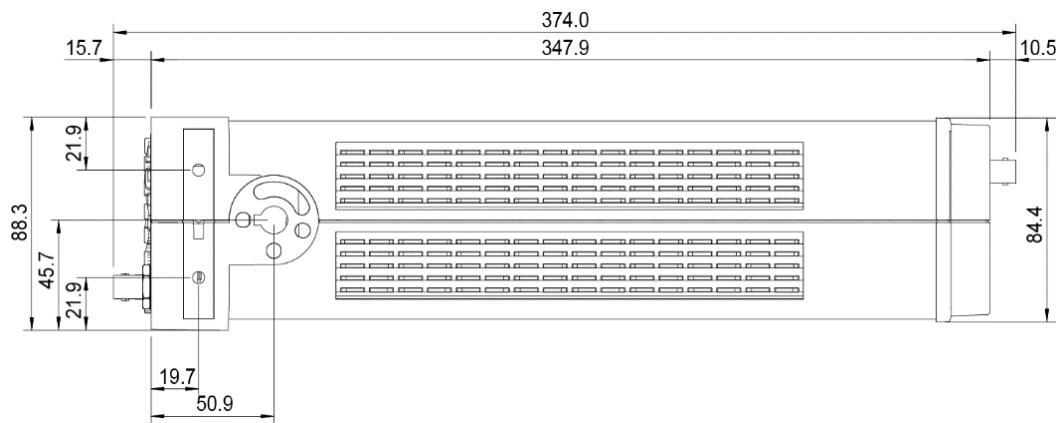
Dimensions (side view, without handle and bumper, in millimeters, nominal)
